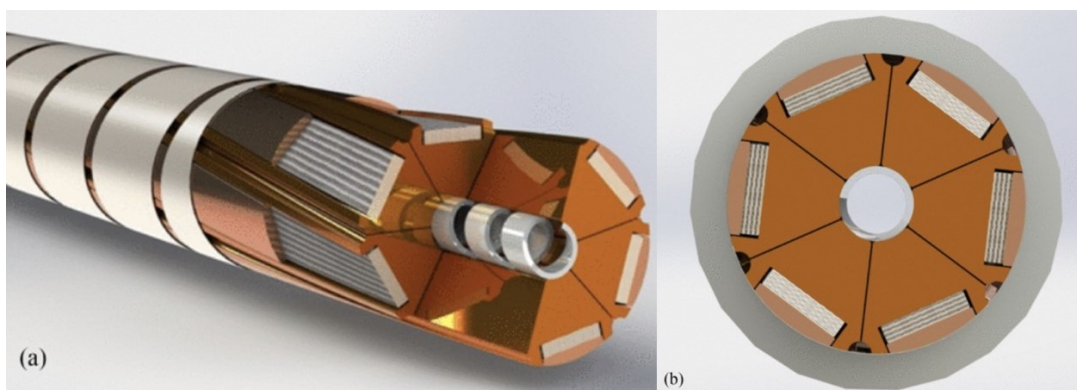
Assembled SECAS cable: (a) with BRAFTs, sector shaped core, fillers, outer steel wrap, and central spiral; (b) schematic representation of the cross-section, with the external steel jacket, from [34].
